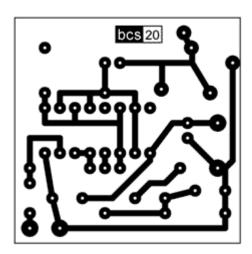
Printed circuit board of the receiver. Click to get a picture at 600 dpi Figure 3. Receiver PCB layout. Click to get 600 dpi resolution image
